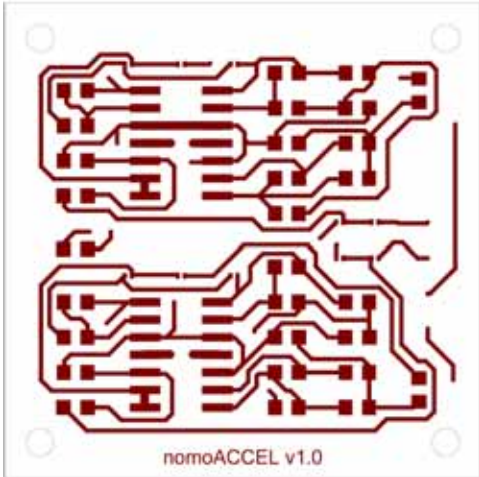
Zoomed view (200%) of the sensor board PCB top signal layer layout.
